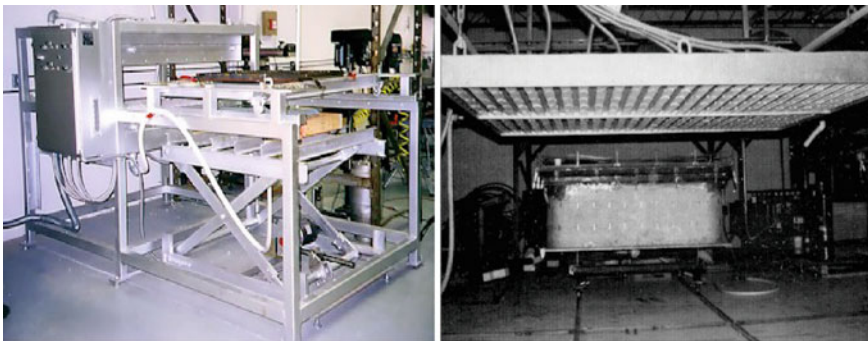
Photographs of thermoforming molding and infrared ovens
